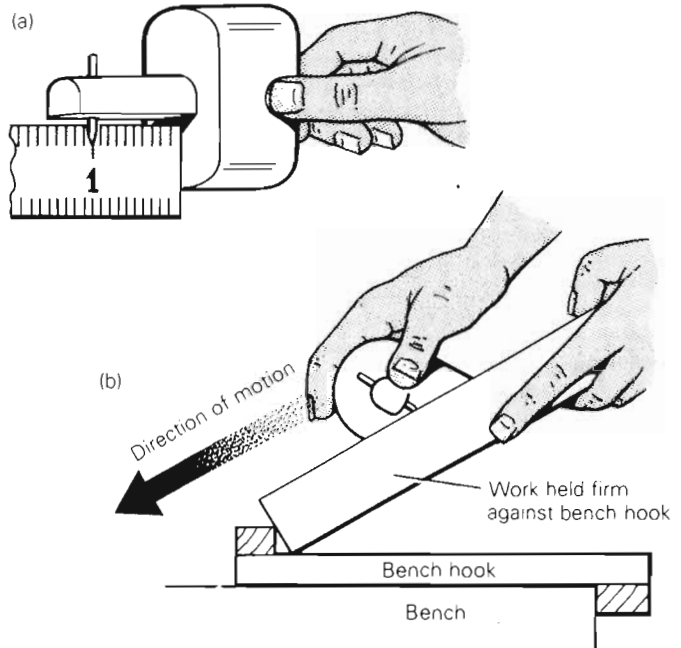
Setting and using marking gauge: (a) setting, (b) using the gauge.
